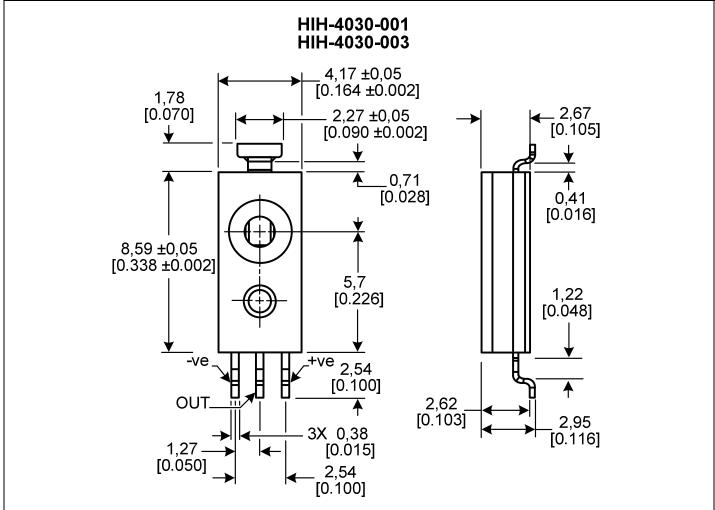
HIH-4030 MOUNTING DIMENSIONS (For reference only. mm/[in])
